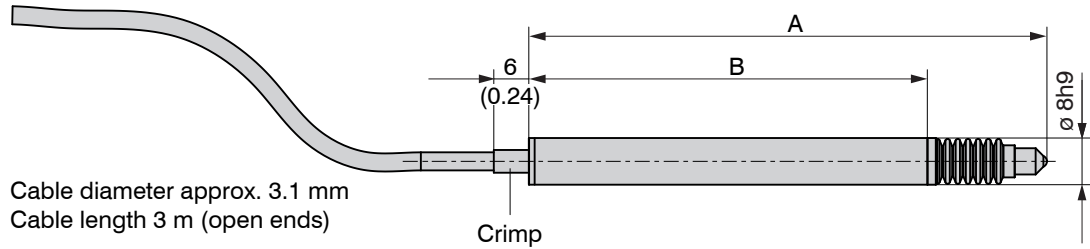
Housing dimensions for gauging sensor DTA-xG8-3-CA
